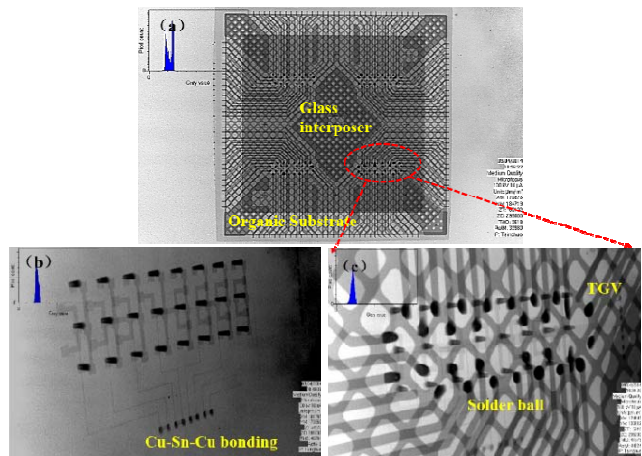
X-ray inspection of 3D assembly results: (a) Top view of assembly results; (b) 3D view of glass interposer bonding, (c) 3D view of assembly structure
